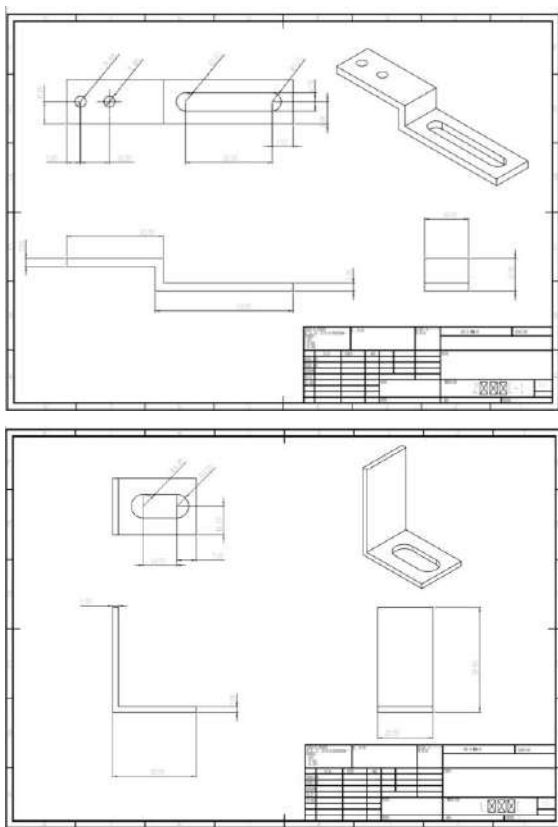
Engineering Design of Z-shaped Bracket & L-shaped Bracket
